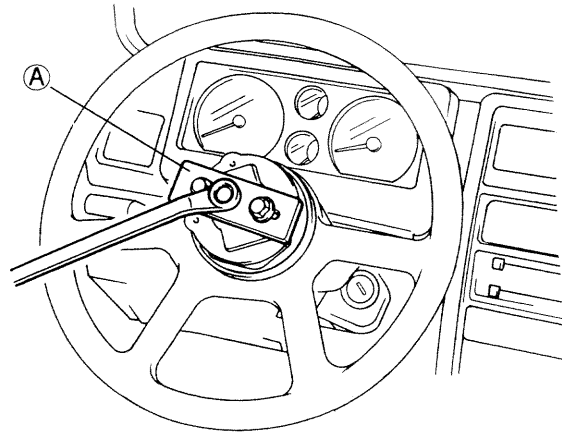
Ⓐ Special tool (Steering wheel remover 09944-36010)
